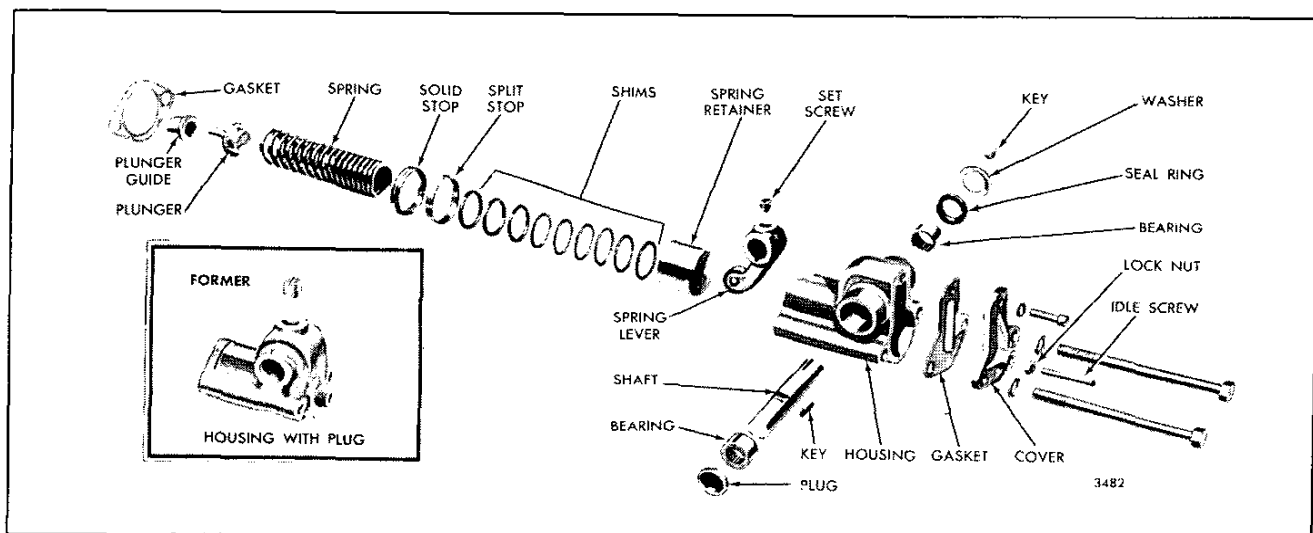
Variable Speed Spring Housing and Shaft Details and Relative Location of Parts
